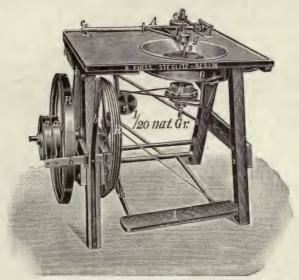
Large automatic grinding machine. 1/20 natural size. (Fuess.)
